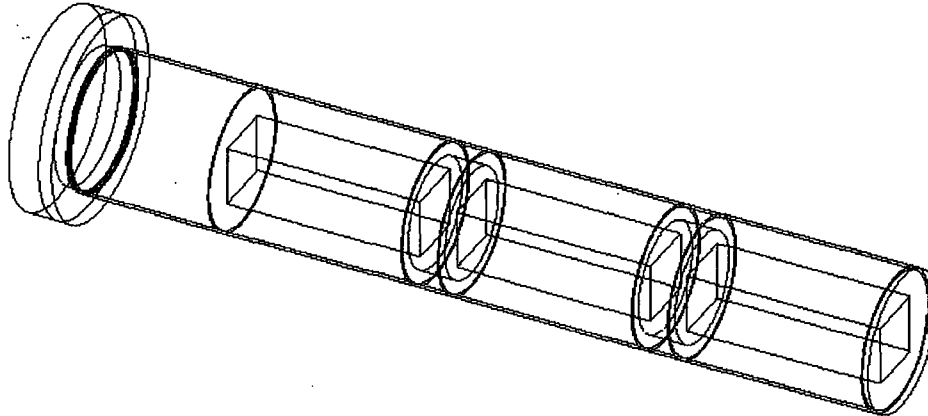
Containment vessel containing 3.24-in.-diam cylinders and 1.4-in.-thick 277-4 canned spacers.
